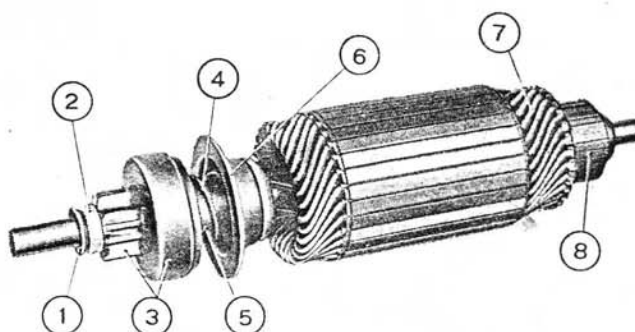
Armature assembly with overrunning clutch drive mechanism.
